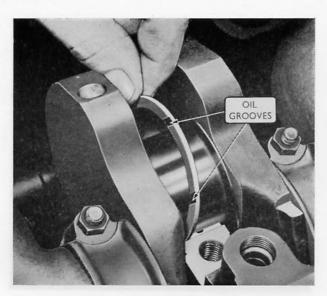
Installing a thrust washer to the centre main bearing. The washer oil grooves must face towards the adjacent thrust face of the crankshaft
